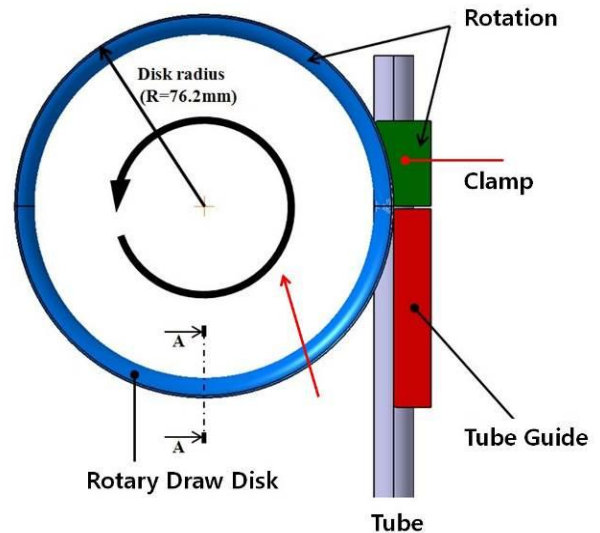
FE model for cold U-bending process using rotary draw bending apparatus
